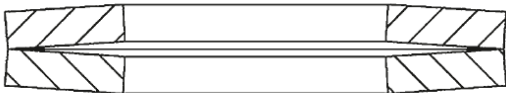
Proper Disc Spring Arrangement (uncompressed)
